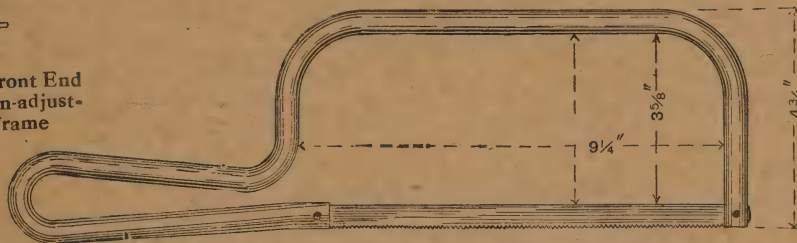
Simple, but Non-adjustable, Hack-saw Frame
